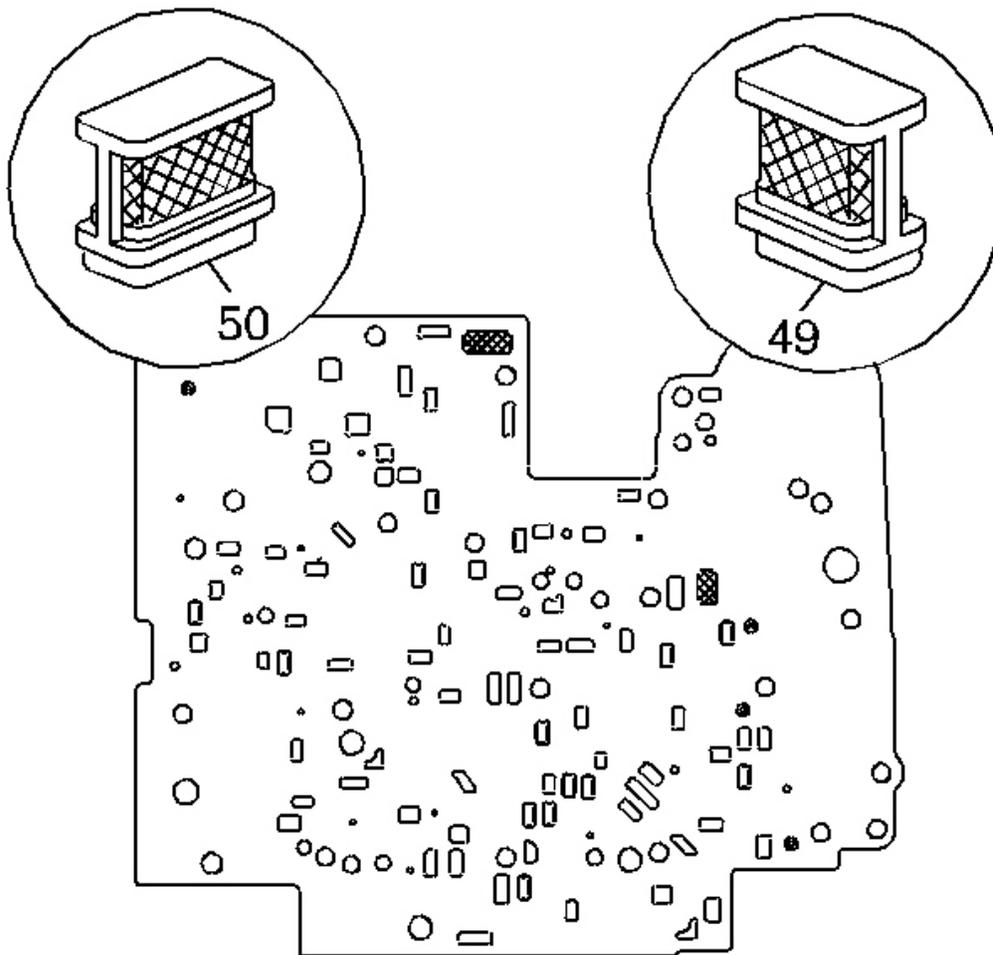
Inspecting Valve Body Spacer Plate & Solenoid Screens
